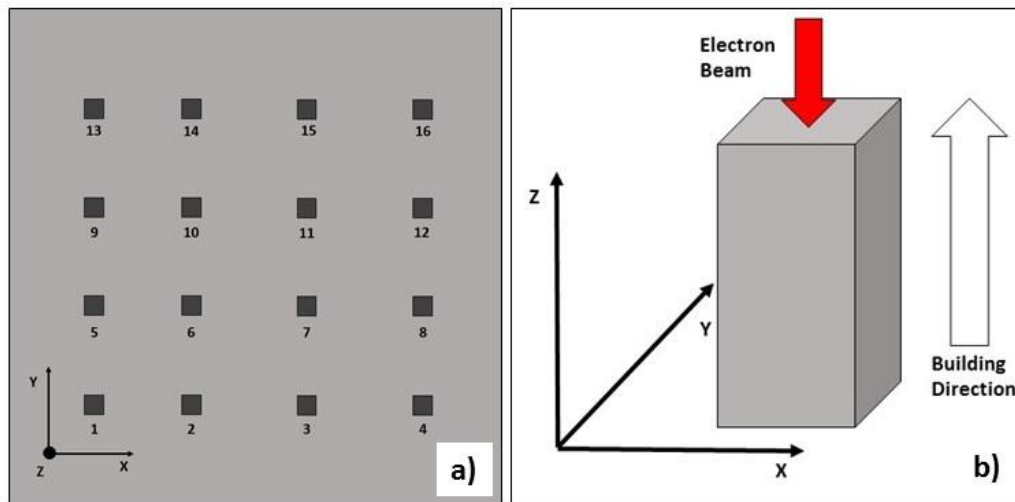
Representation of the EBM building job (a); specimens building scheme (b)
